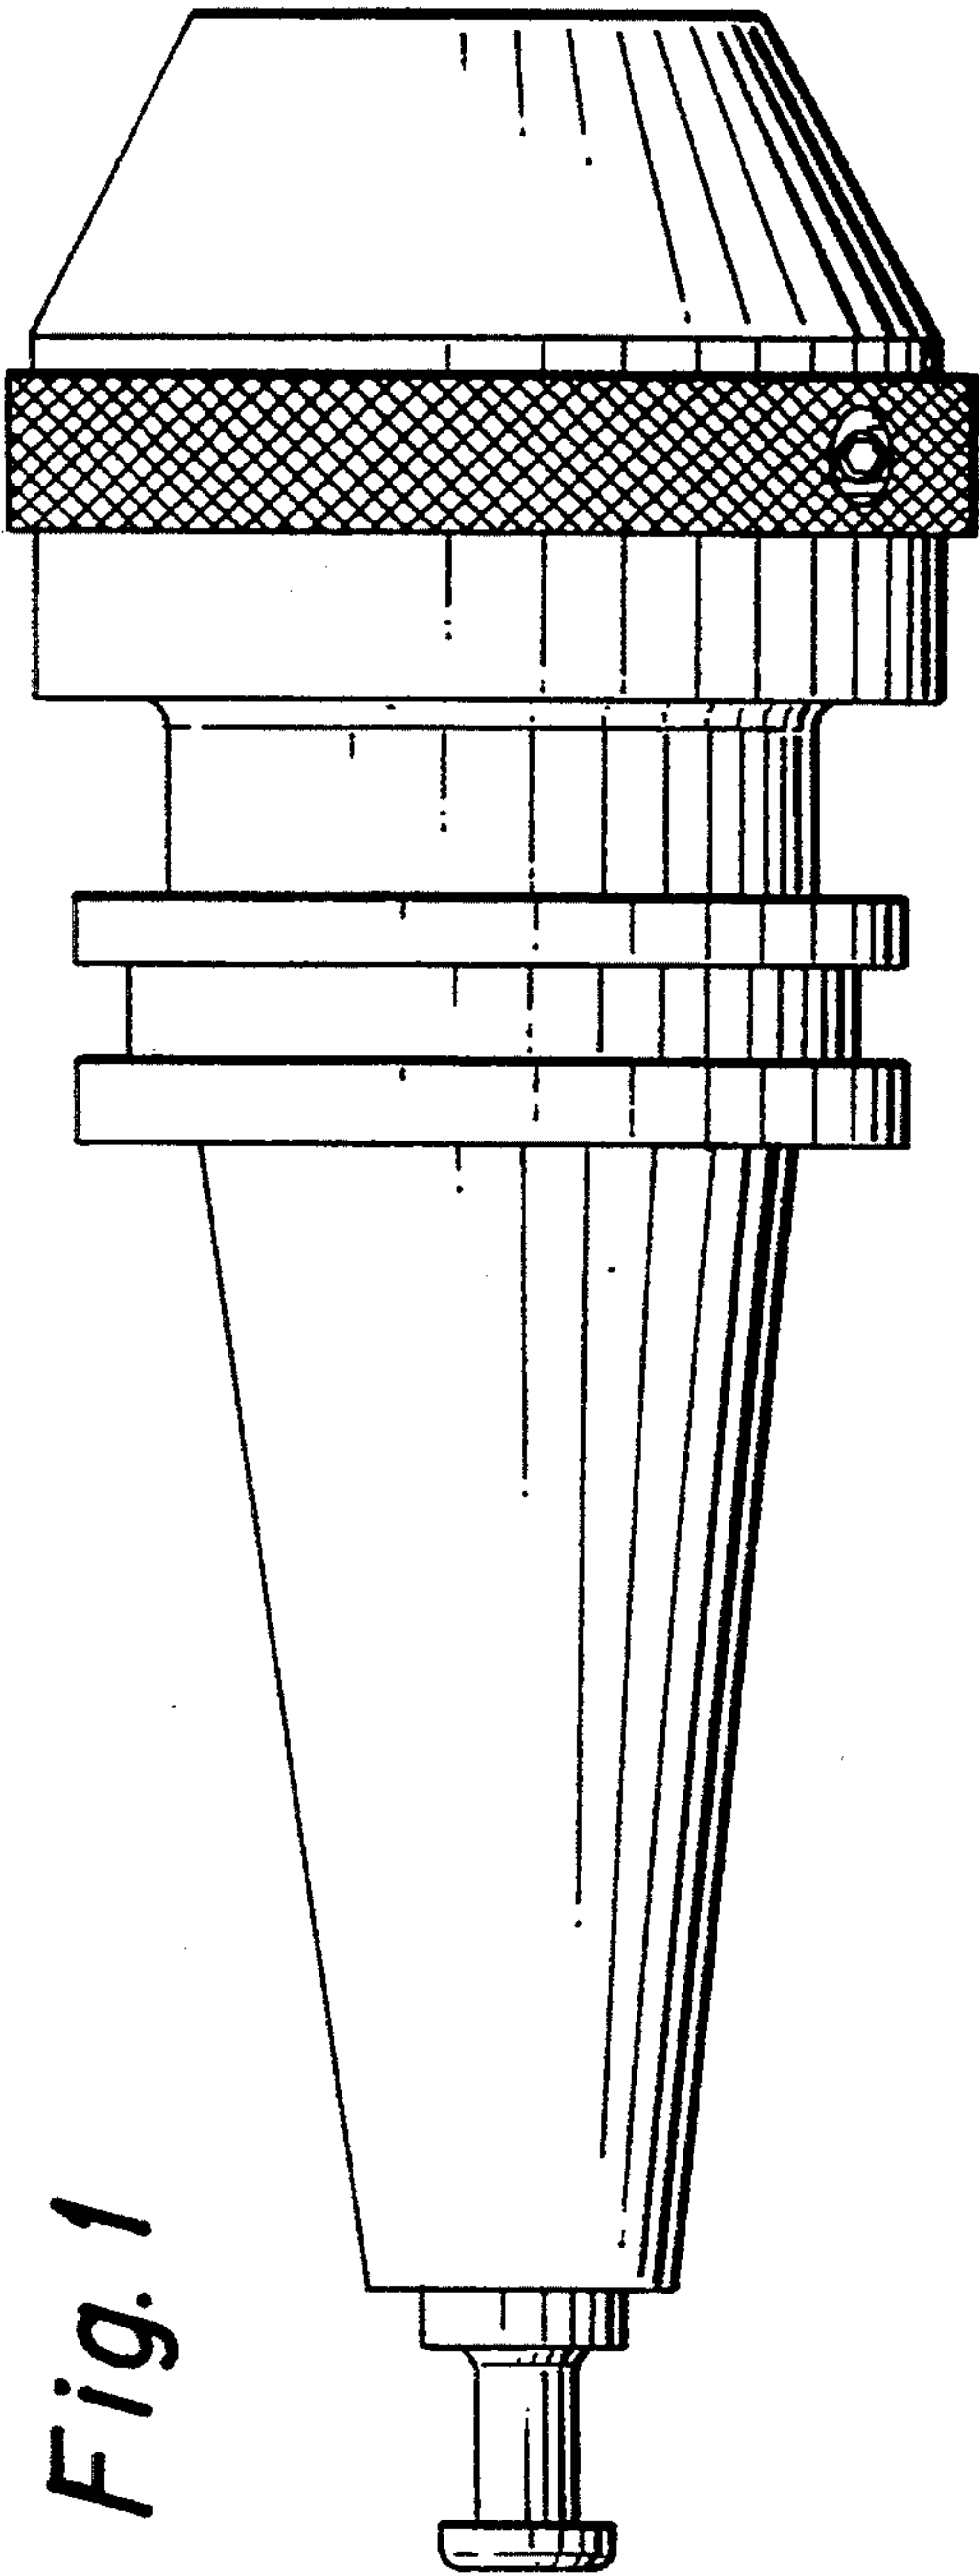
is a side view of our clamp bushing having an integrated conical mounting means all other side views being identical;
